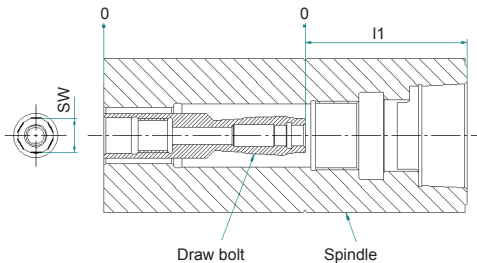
control dimensions for the installation of the draw bolt (I1), key width on the draw bolt (SW)
